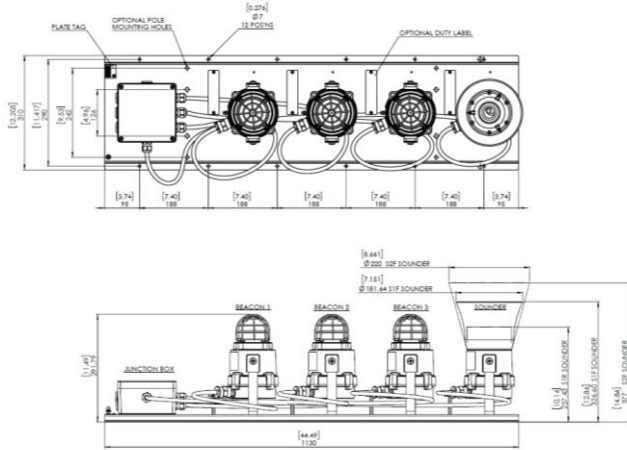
Mounting Detail and Dimensions of BEx Stack
